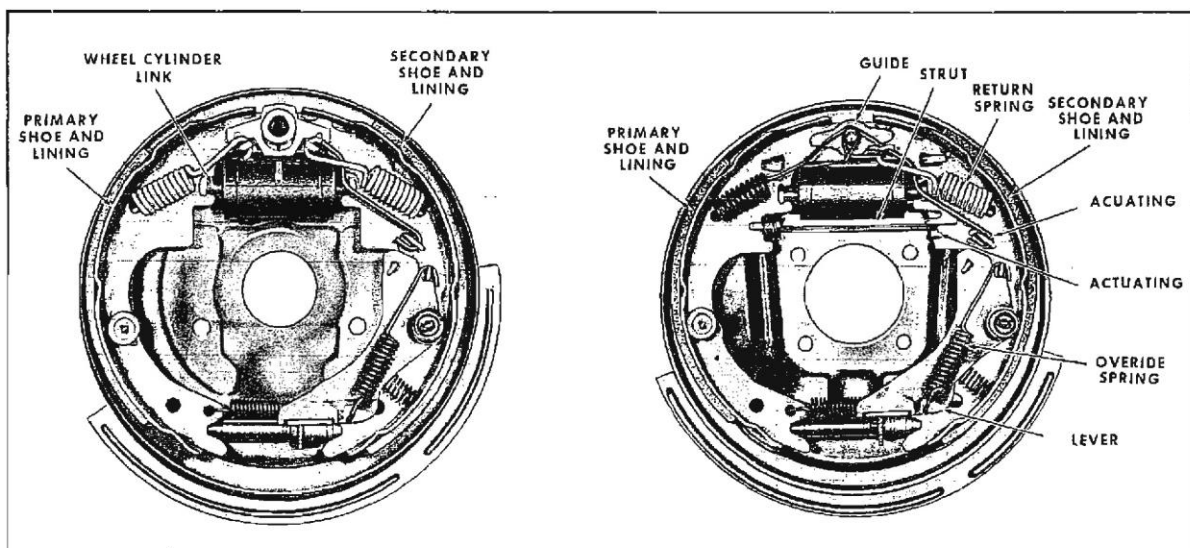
Front and Rear Self-Adjusting Brake Assemblies
